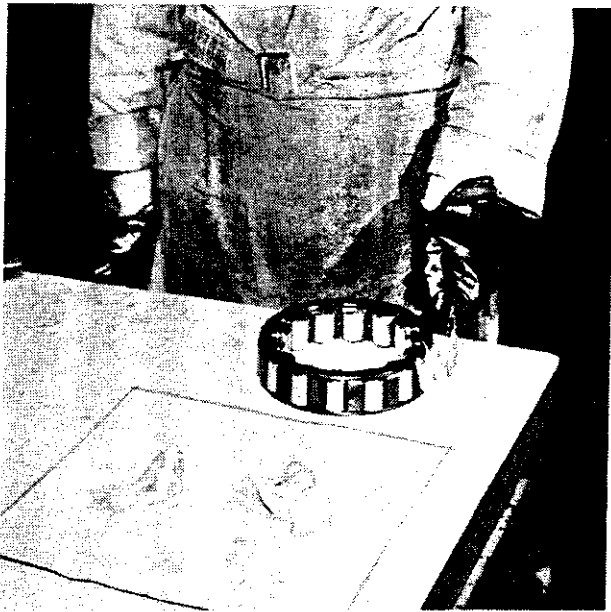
Coating O.D. of Roller and Cage Assembly 7749
